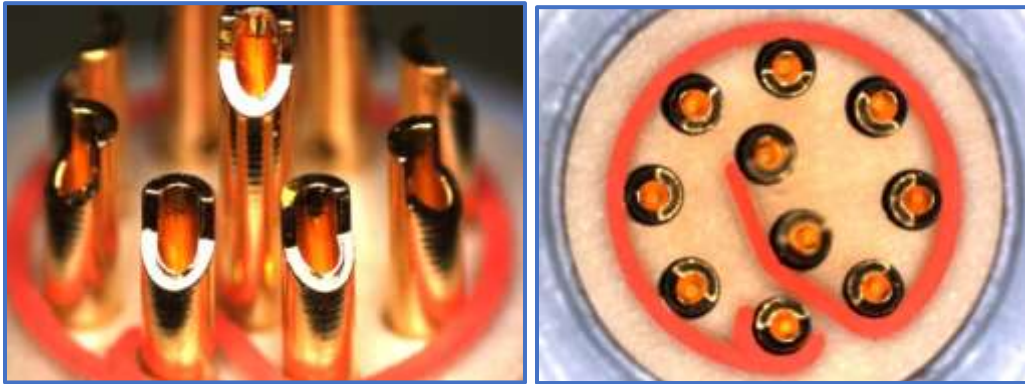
REDEL SOLDER CUP DETAIL: CUPS ARE VERY CLEAN AND PIN IDENTIFICATION PATTERN IS CLEARLY MARKED
